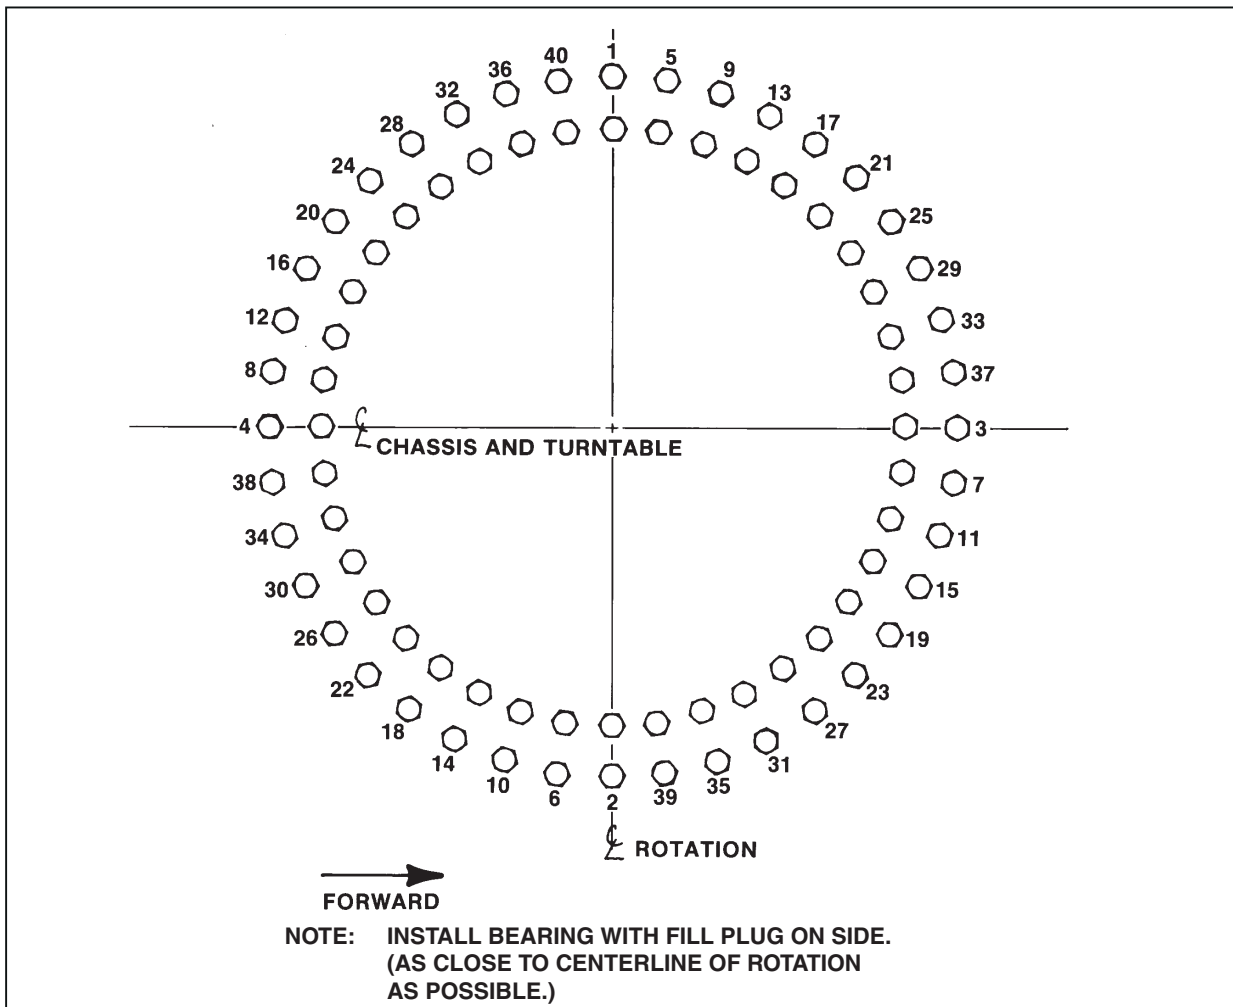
Swing Bearing Bolt Torquing Sequence
